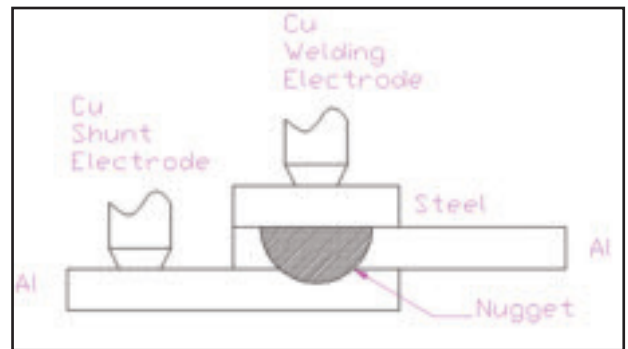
Schematic representation of a single side conductive heat resistance spot welding (CHRWSW) application.
